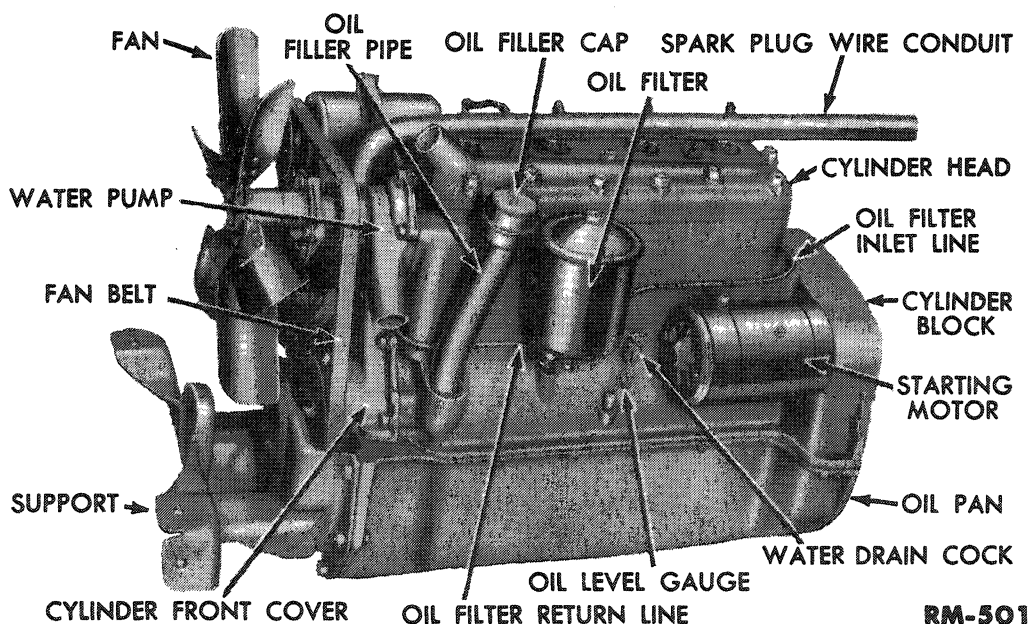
Left $\frac{3}{4}$ Front View of Engine
